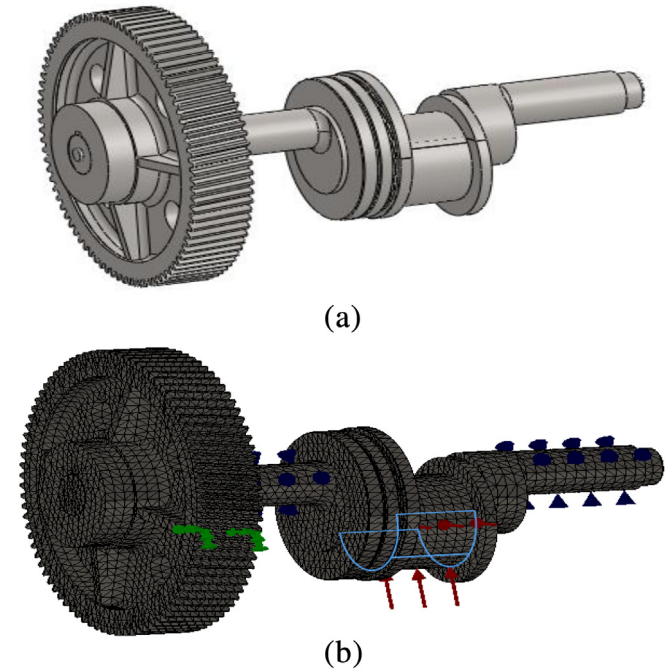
(a) Solid CAD model of the crank assembly, (b) Loading and boundary conditions on meshed model of the crank assembly.
